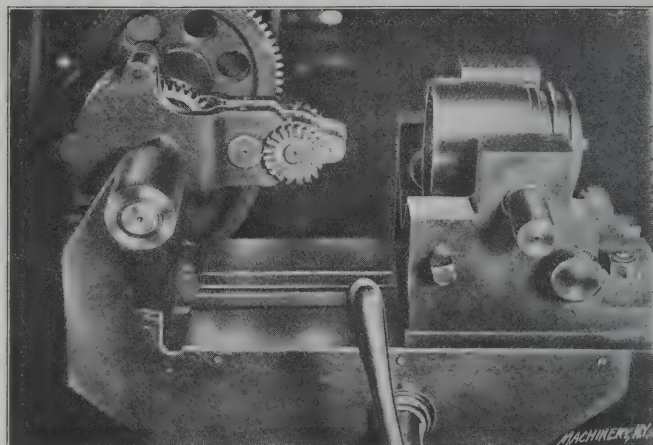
Special Machine for Milling the Space between the Wrist-pin Bosses between V-jaws with plugs inserted in each end of the reamed wrist-pin hole. The mechanism operating the mills is too plainly indicated to need further explanation. Just before the last inspection, the pistons are placed in the jig shown at B, Fig. 8, and the wrist-pin hole is carefully hand-reamed with a pilot reamer.
